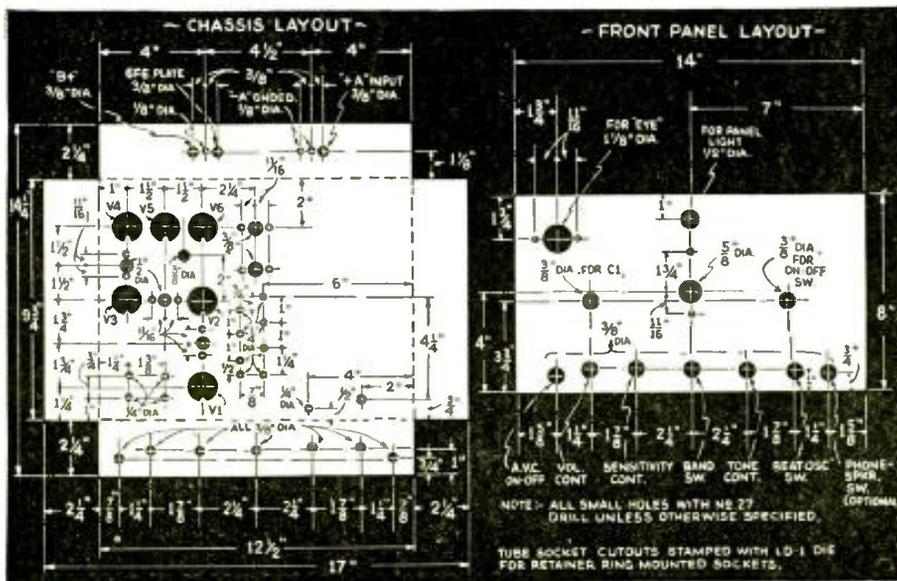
Physical specifications for making the front panel and chassis for "The Seafarer."
